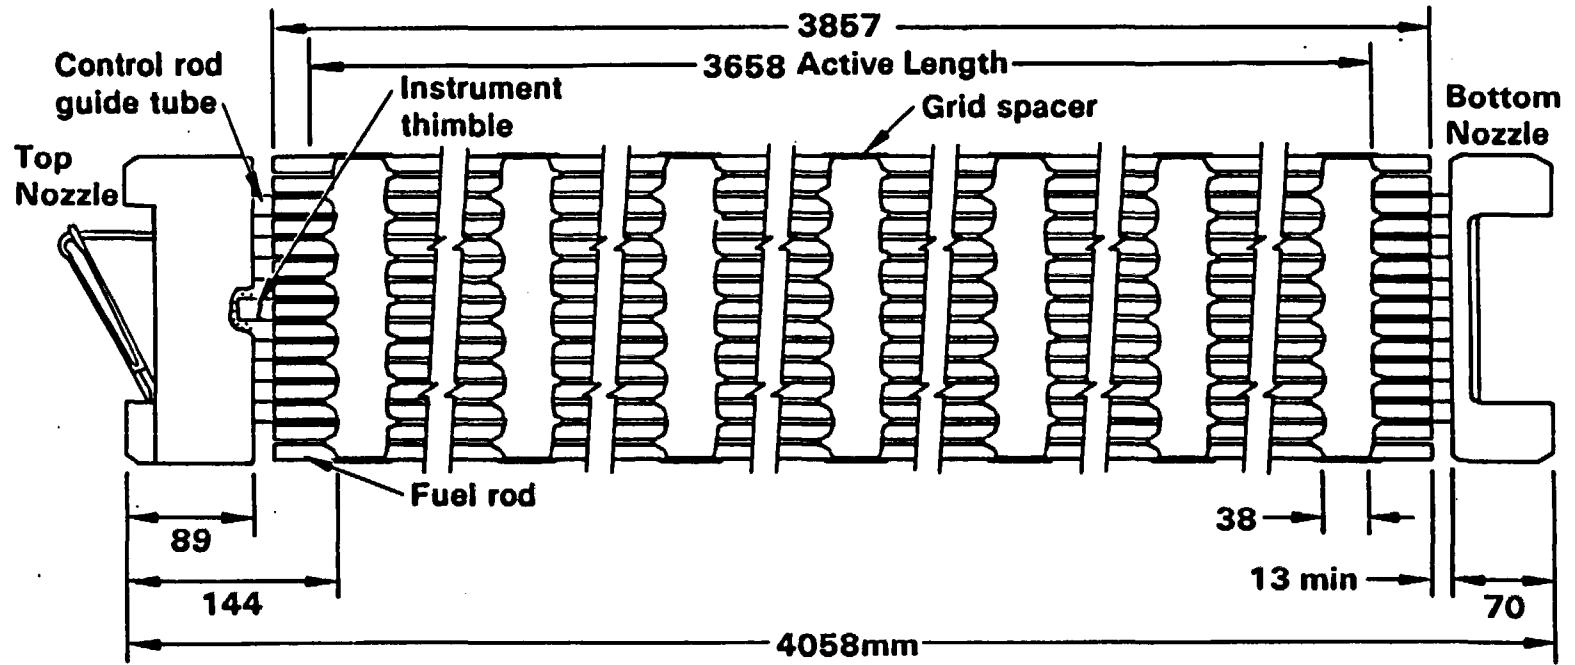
Surry 15x15 PWR Spent Fuel Assembly
